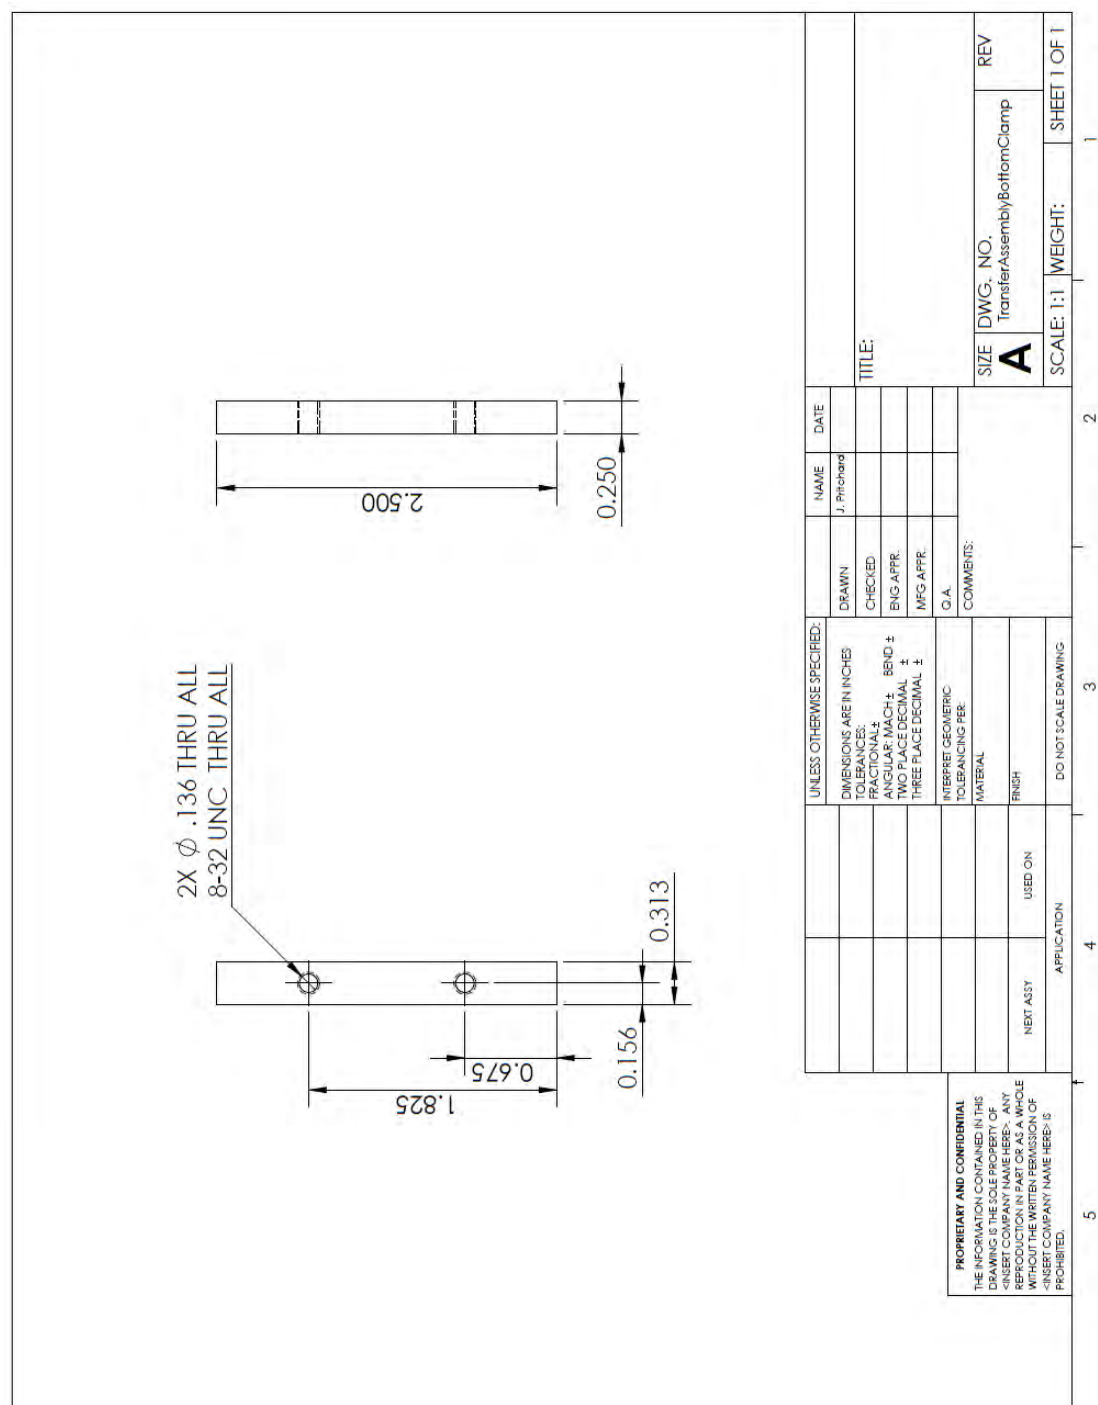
Dimensional drawing of bottom ribbon clamp used in both coupon size and large geometry transfer assemblies.
